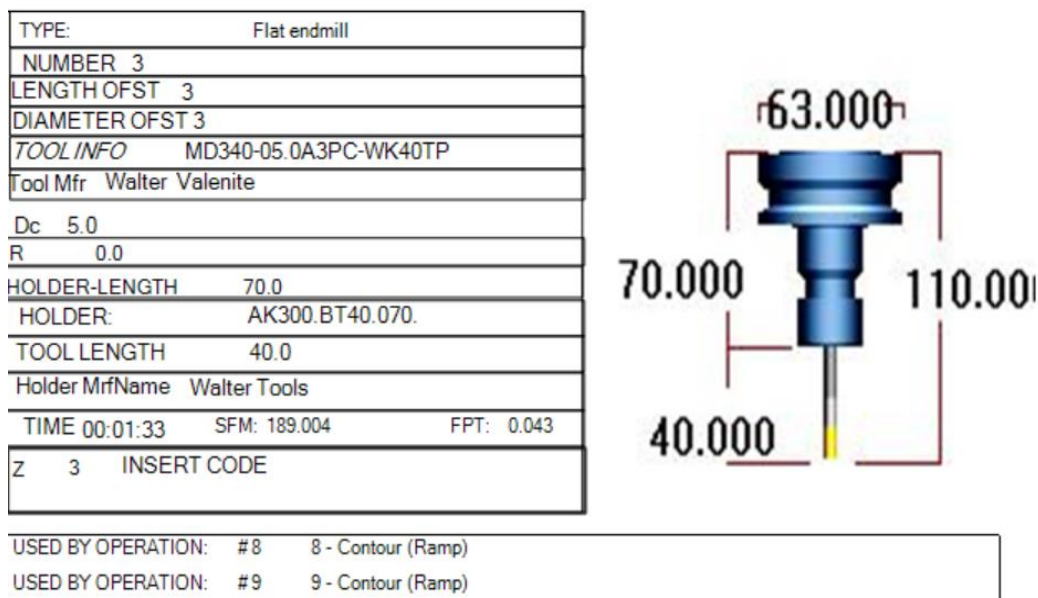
Modified setup sheet tool info. (Sarker, 2023)
